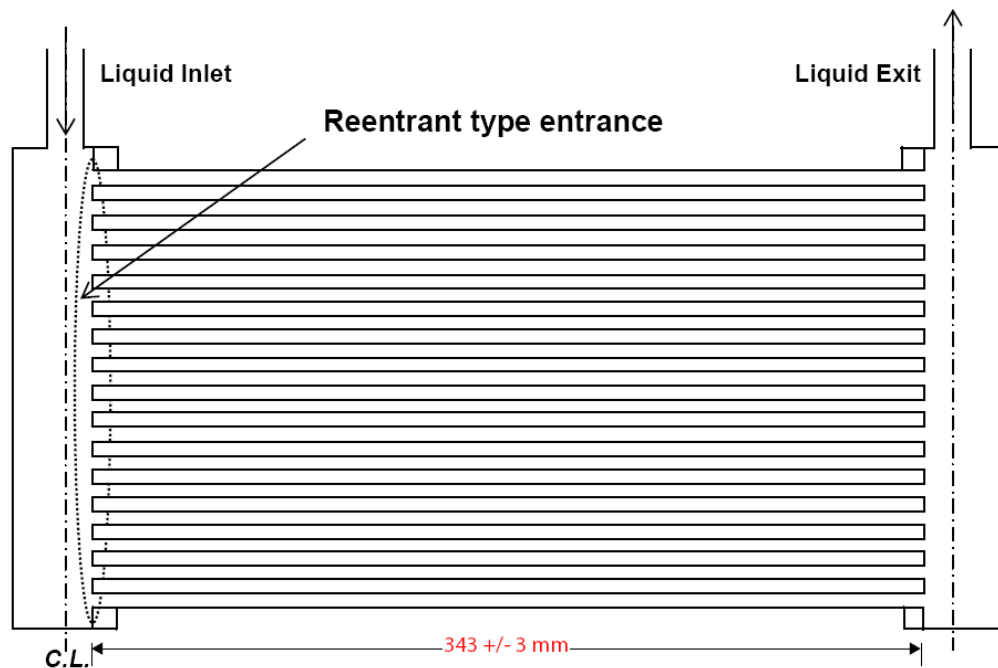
Inlet and exit connections and configurations of multi-port MCHX test slab.
